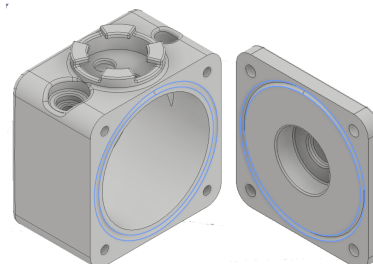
CAD drawings of the turbine design optimization. A: The light sensors were included in a bayonet lock connecting to the housing to facilitate set-up at the MRI scanner. B: An elliptical groove with a rubber seal refined the closure of the side wall onto the main housing to reduce air loss.
